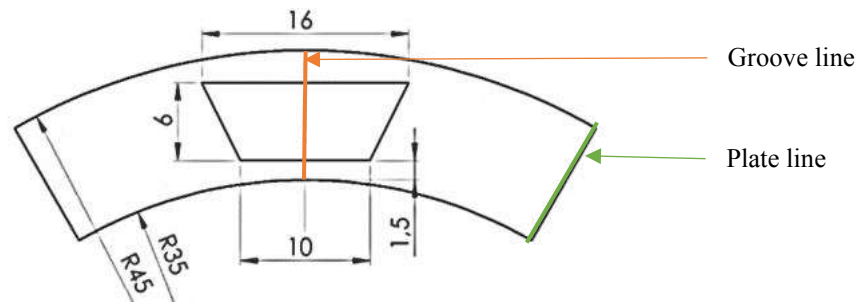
Sketch and geometric dimensions of the groove in the plate
